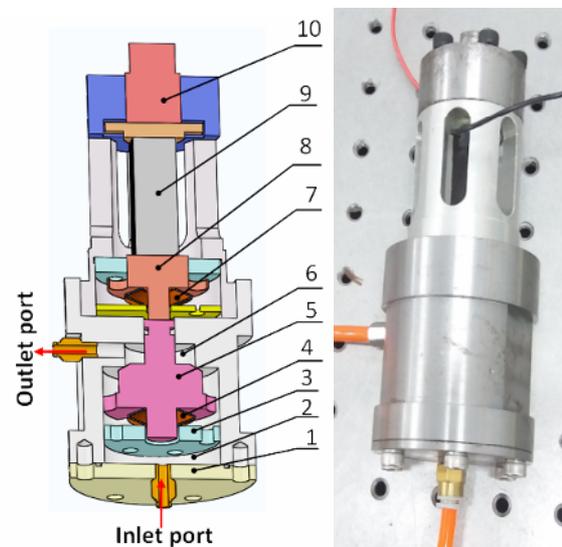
The designed high speed on/off valve (1. Bottom end cap, 2. Inlet chamber, 3. Spring preloading plate, 4. Disc spring1, 5. Mobile plate, 6. Outlet chamber, 7. Disc spring 2, 8. Output rod, 9. Piezoelectric stack, 10. Adjusting bolt).
